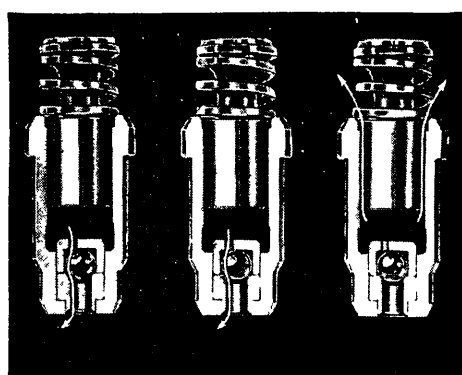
If plunger fails to kick back when tested as in Fig. 9, look for dirt under check valve (left); damaged check valve (center); too much clearance between plunger and cylinder (right)
